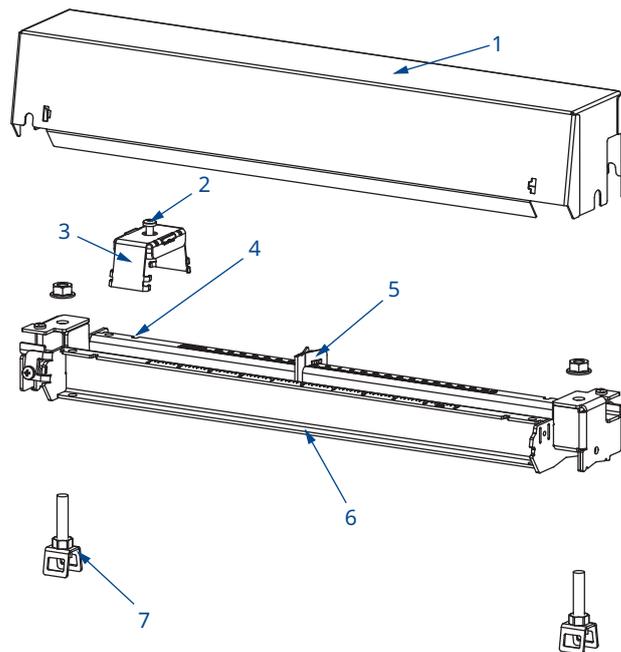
Disassembly of the transducer mounting fixture Variofix C
